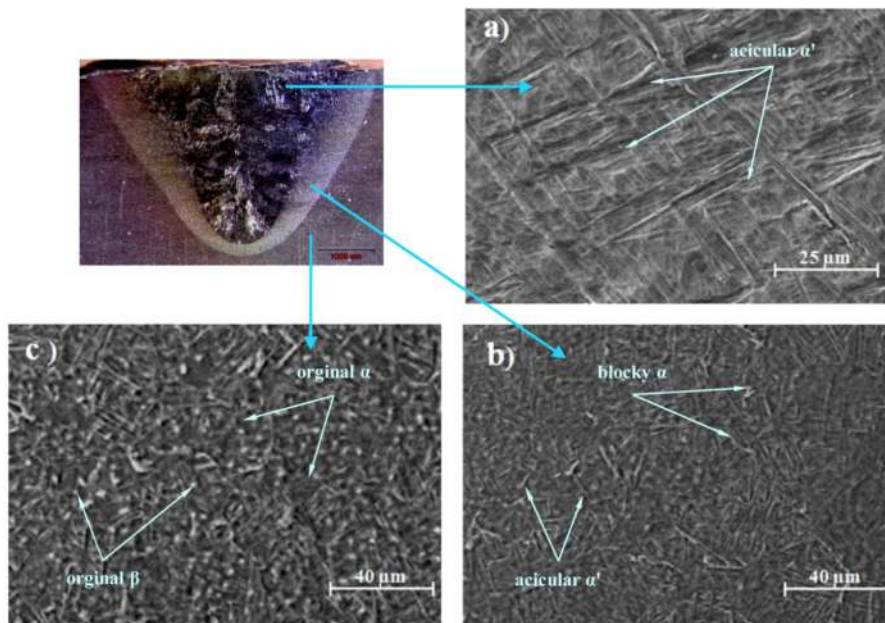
Metallographic images from weld cross section at welding speed of 6 mm/s.
